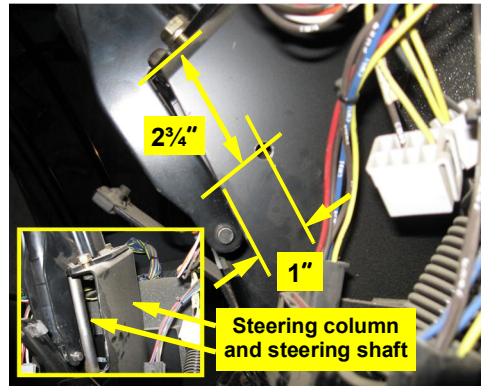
Location of drilled hole in steering column (see inset for steering shaft location)
